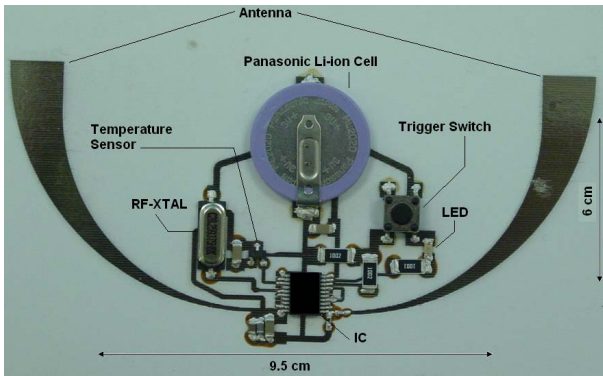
Previous work [5] showing wireless-sensor transmitter prototype on a paper substrate, using inkjet-printing technology [dimensions: 9.5 cm x 6 cm].
